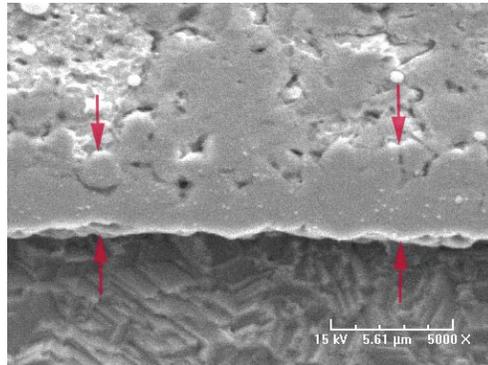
IMC at the PCB Side of Board-6 (no fresh part)
